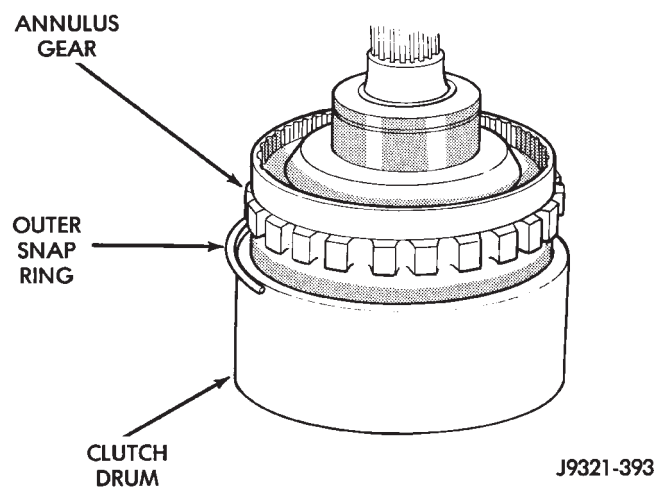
Clutch Drum And Outer Retaining Ring Installation
